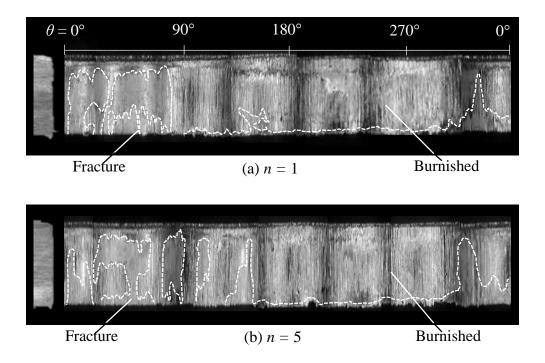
Surface of sheared edge of die-quenched steel sheet in punching without centring using fixed die for (a) n = 1, (b) n = 5 and v = 75 mm/s.
